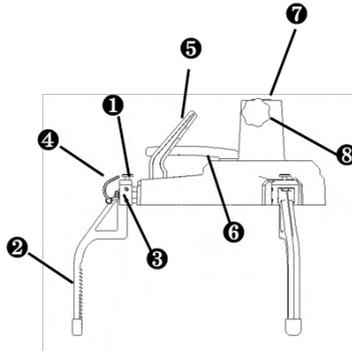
Wheel Clamp (Rim Clamp) AUTEL-CSC0500/19
